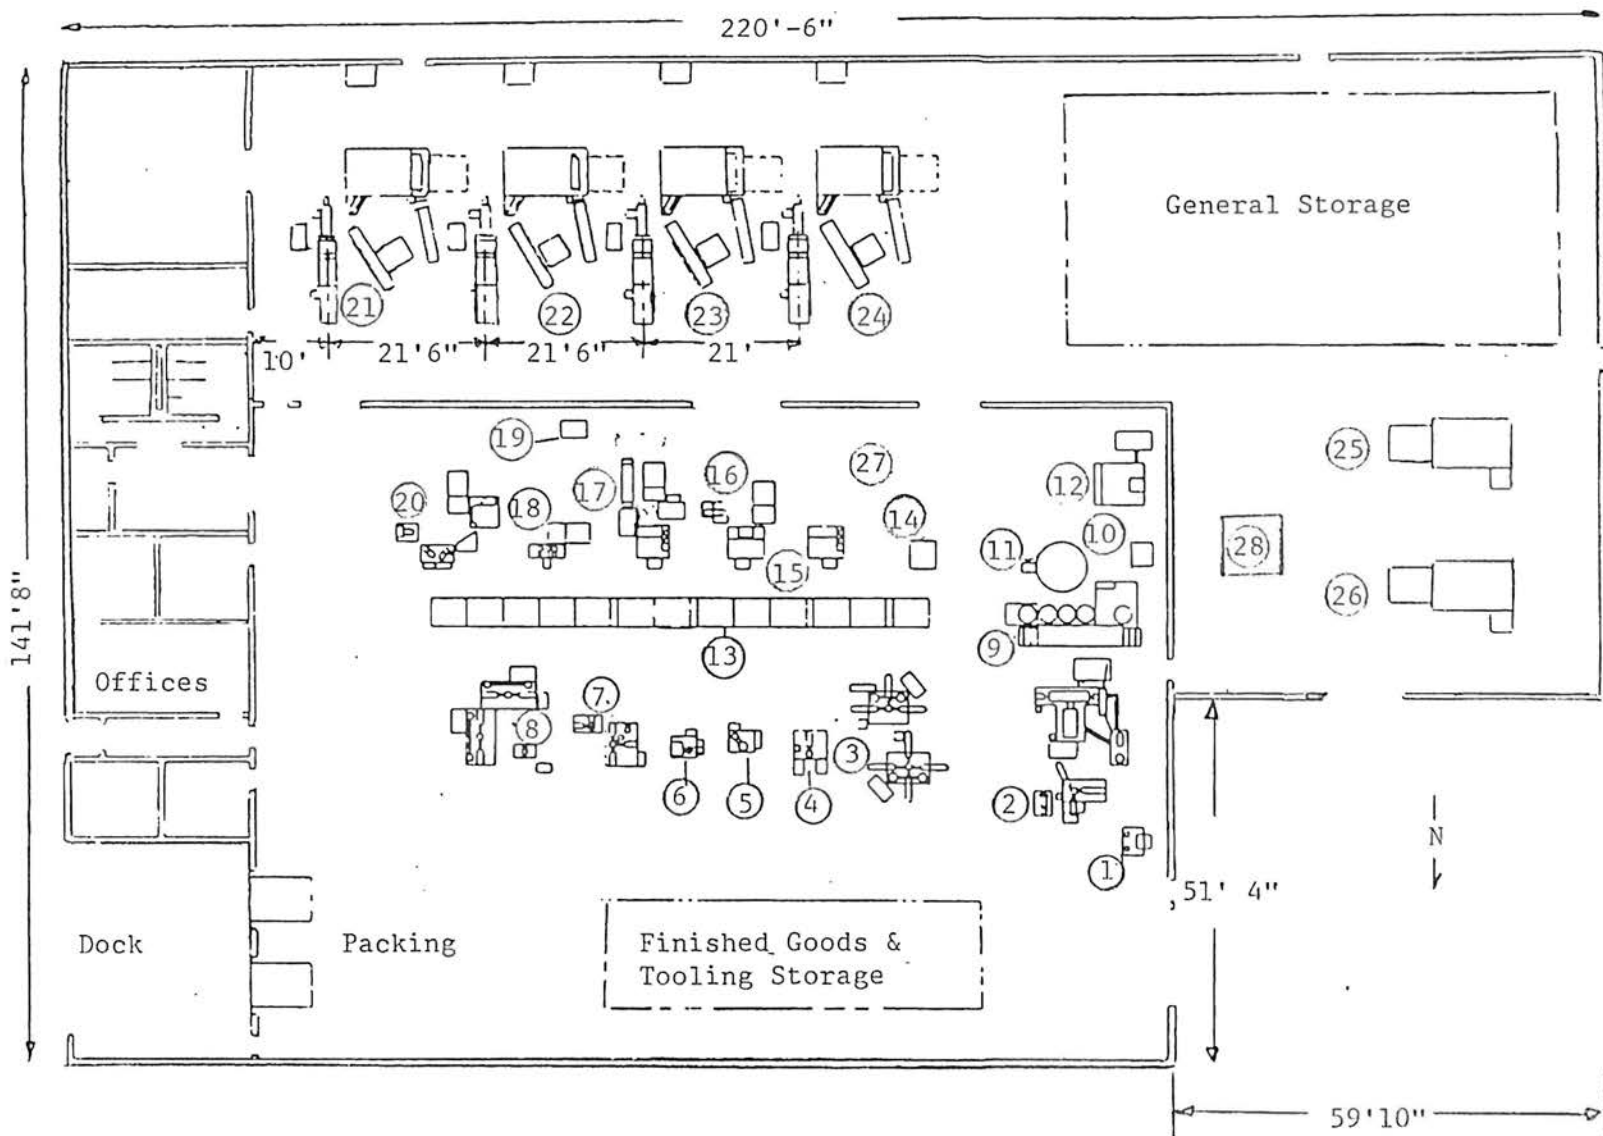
EXHIBIT B: ALUMINUM AND ZINC PLANT GROUNDS LAYOUT
